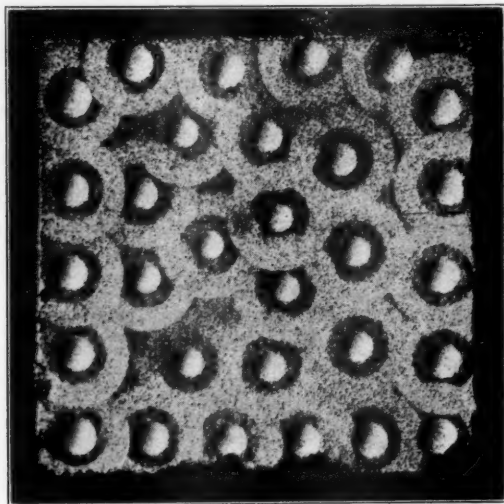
MOLD SURFACE TESTED FOR HARDNESS
